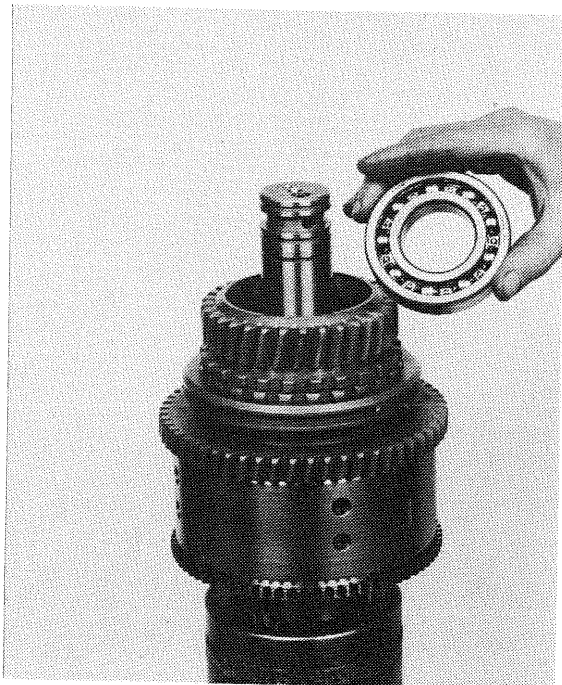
Disassembly of the PFR Clutch (1 of 4)
